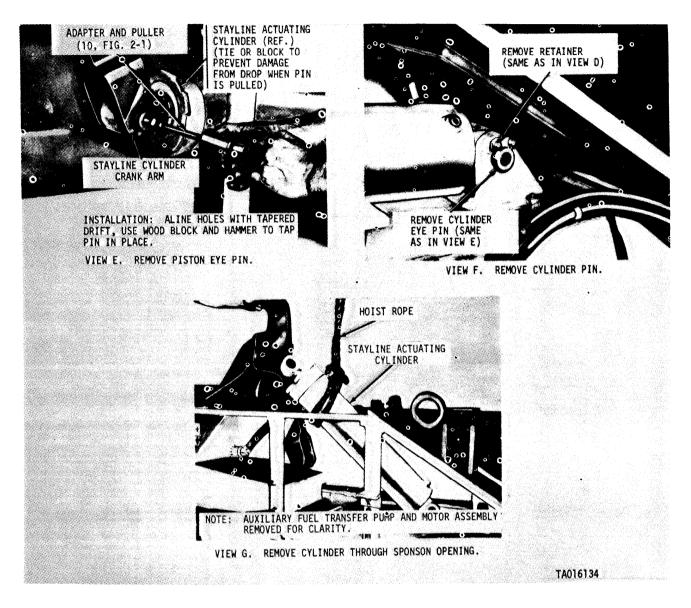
Boom stayline actuating cylinders-removal and installation (Sheet 2 of 2).
